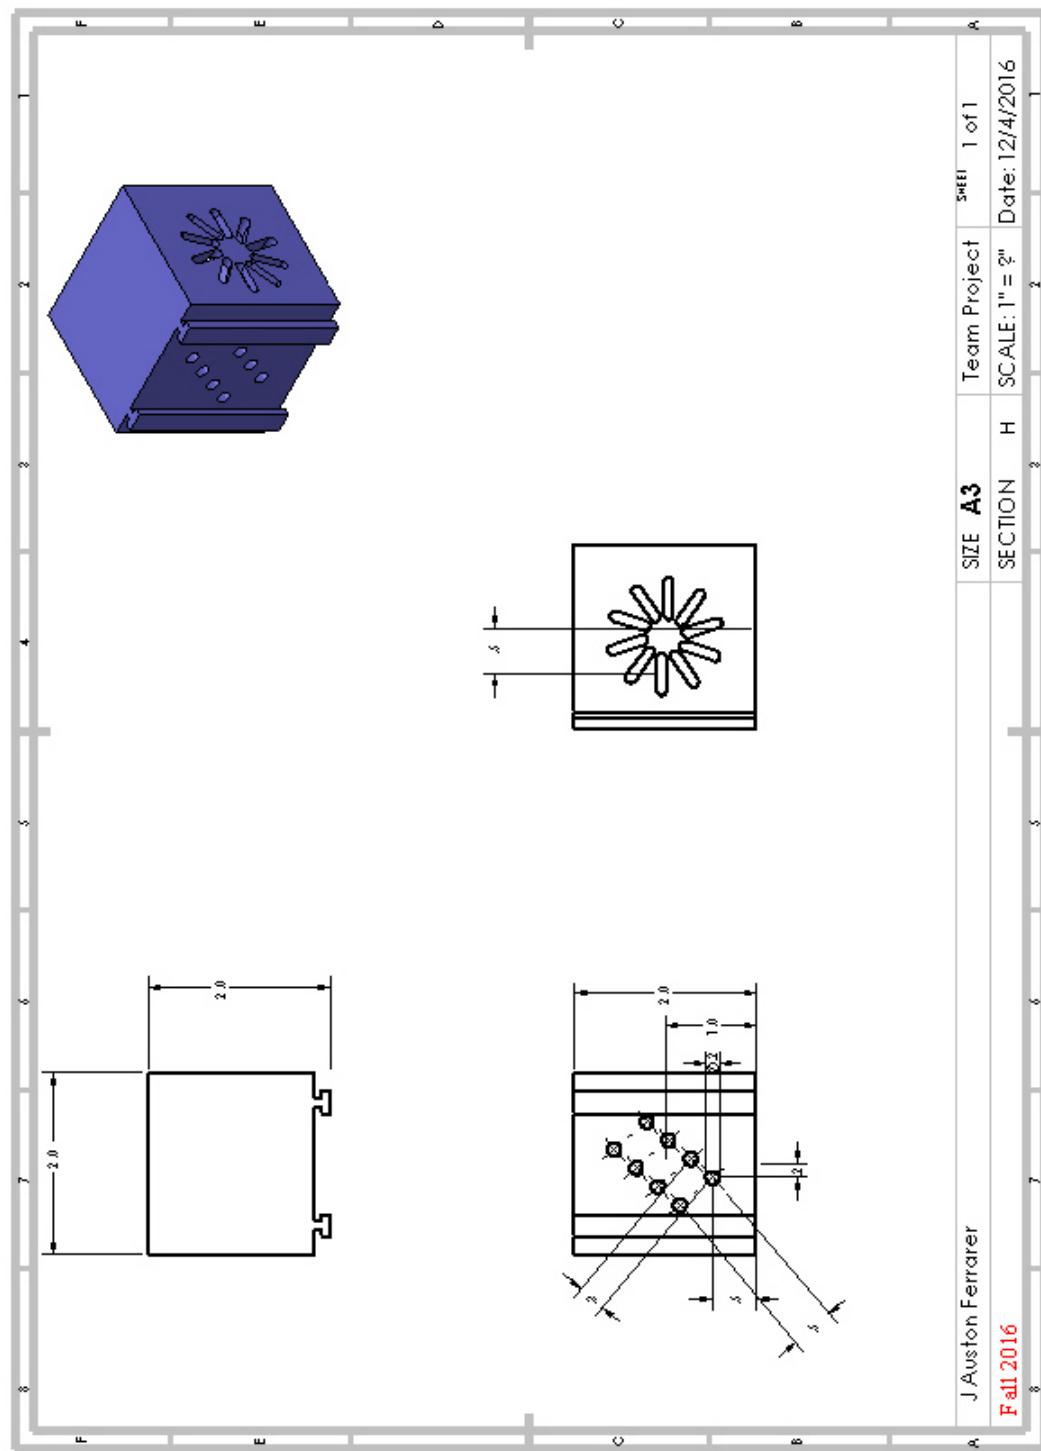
Ferrarer, Auston: Printing Nozel Casing
